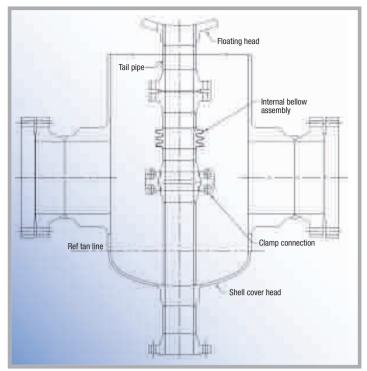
No non-standard designs are required for configuration 2 of the special flange joints, so it is less complex than the others diameter (BCD) and the bolting arrangement is not through-bolt type. This flange is bolted to another non-standard flange (Flange 2; Figure 1C) which is welded to the shell cover.
